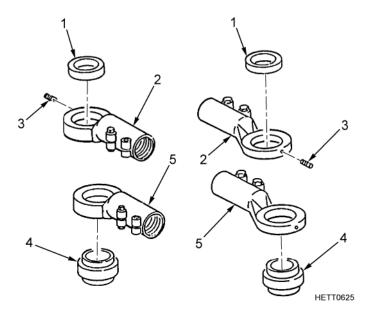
Connecting Link Sleeve Bearings Disassembly.
